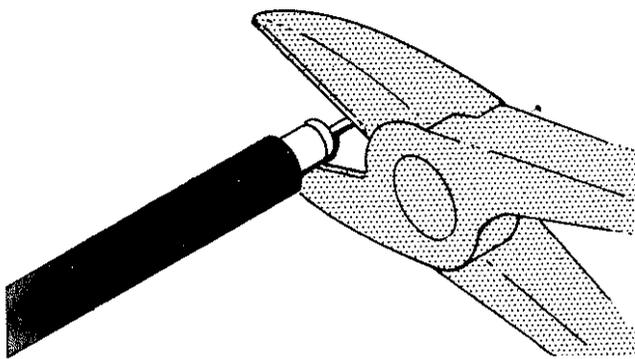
The replaceable probe tip can be removed as illustrated here. Care should be taken not to squeeze or nick the grounding sleeve.
